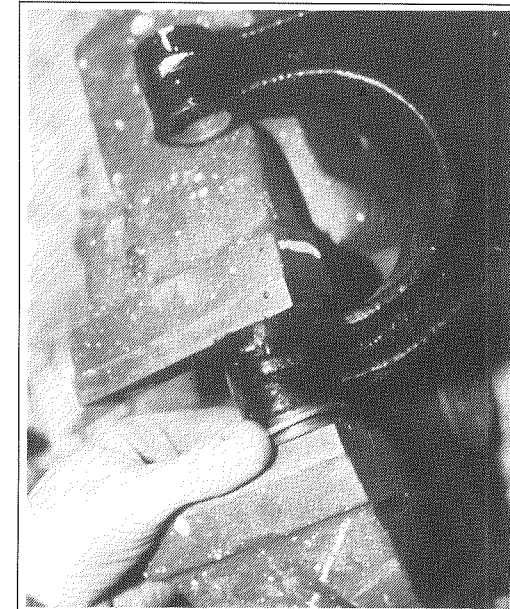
Ensure that the inner faces on the wishbone assembly are clear of rust etc., place a nylon bush through an inner dust shield and press in. I like to smear the assembly with copper grease before doing this. Repeat for the others.
